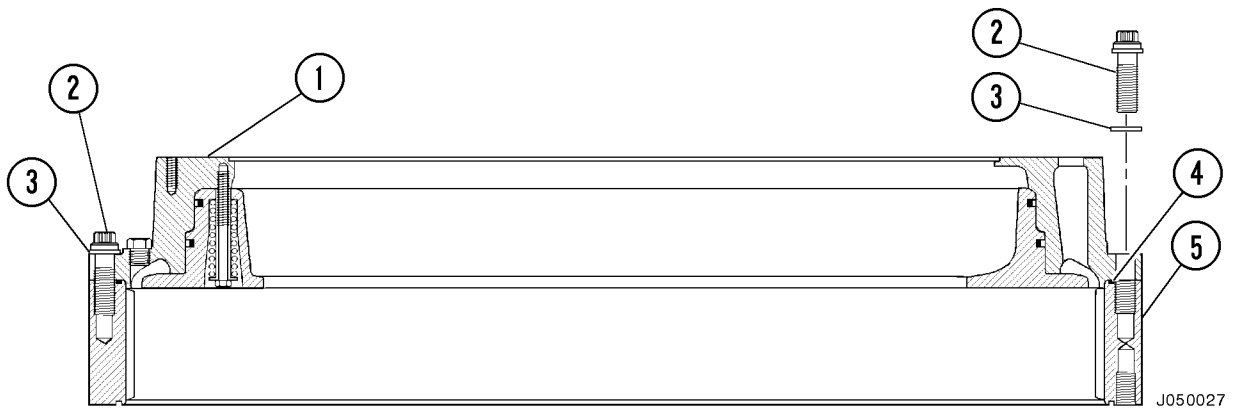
PISTON/HOUSING ASSEMBLY REMOVAL
